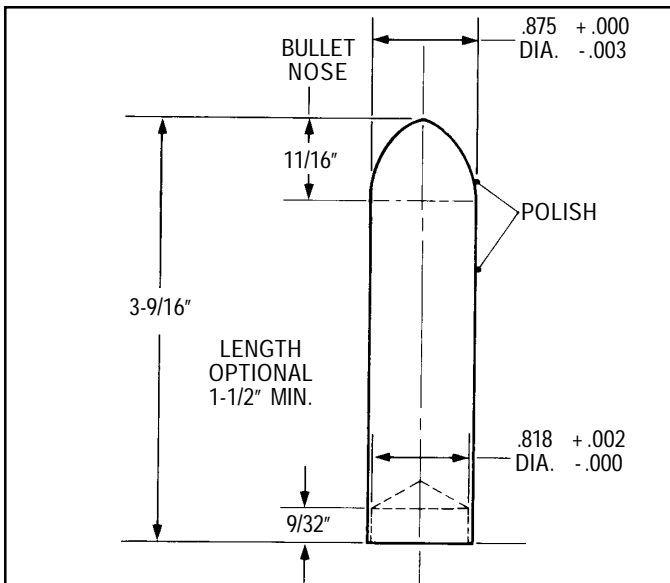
SEAL BULLET (FOR ASSEMBLING HYDRO-MAX FILTER AND END CAP OVER POWER PISTON)
